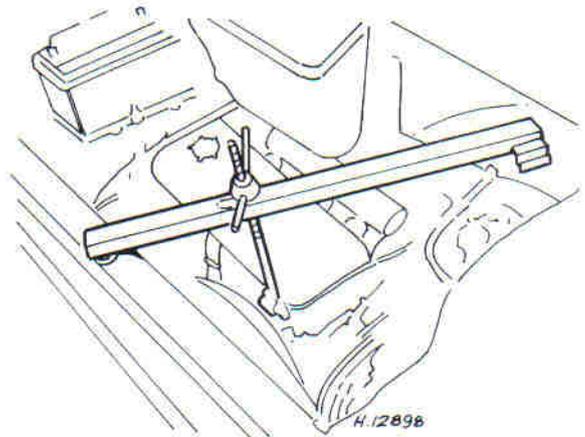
One method of supporting the engine during removal of transmission (Sec 4)
